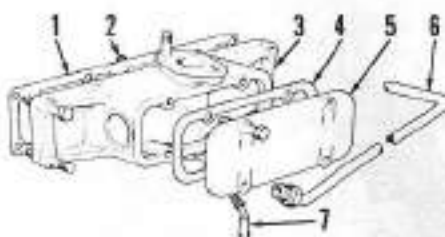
Gasoline engine intake manifold is heated by hot water. Tube (4) connects manifold to water pump and "O" ring (2) seals water passage to cylinder head. A ball check valve in drain tube (7) allows gasoline overflow from carburetor to drain from manifold. Later models will have a coiled drain tube instead of ball check valve. Be sure that neither the valve or tube is choked.
